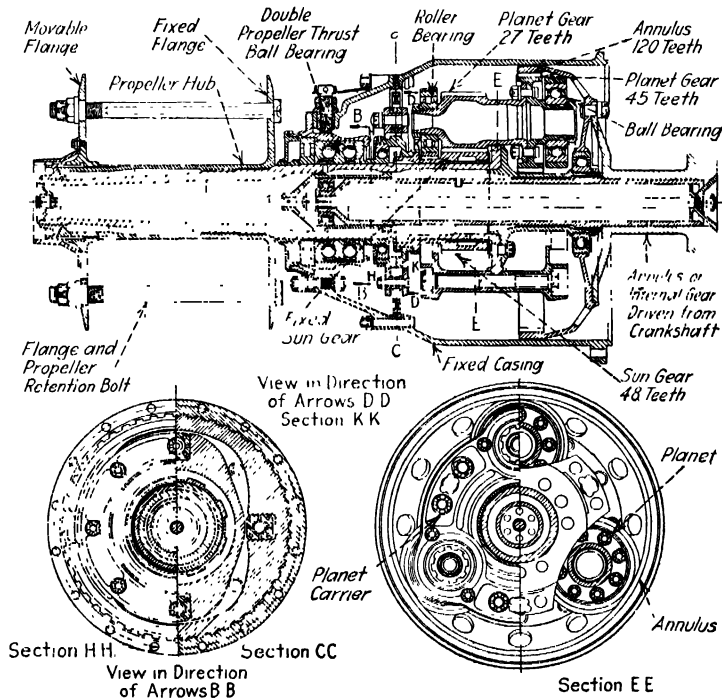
Diagrams Showing Rolls-Royce Epicyclic Speed Reducing and Propeller Drive Gearing.
